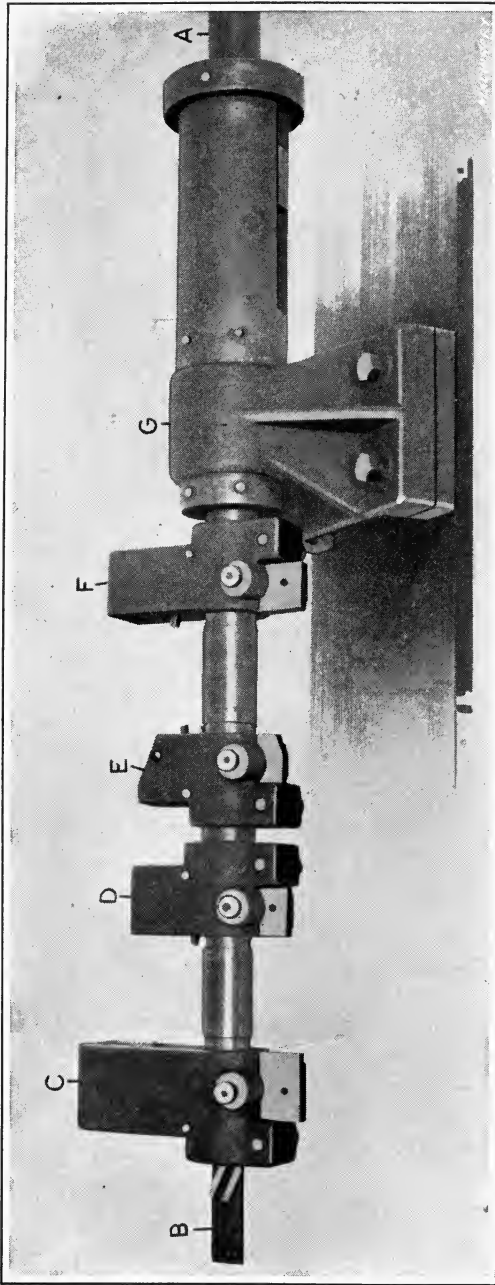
Multiple-tool Facing Bar used in facing Four Bosses of a Machine Tool Spindle Head
